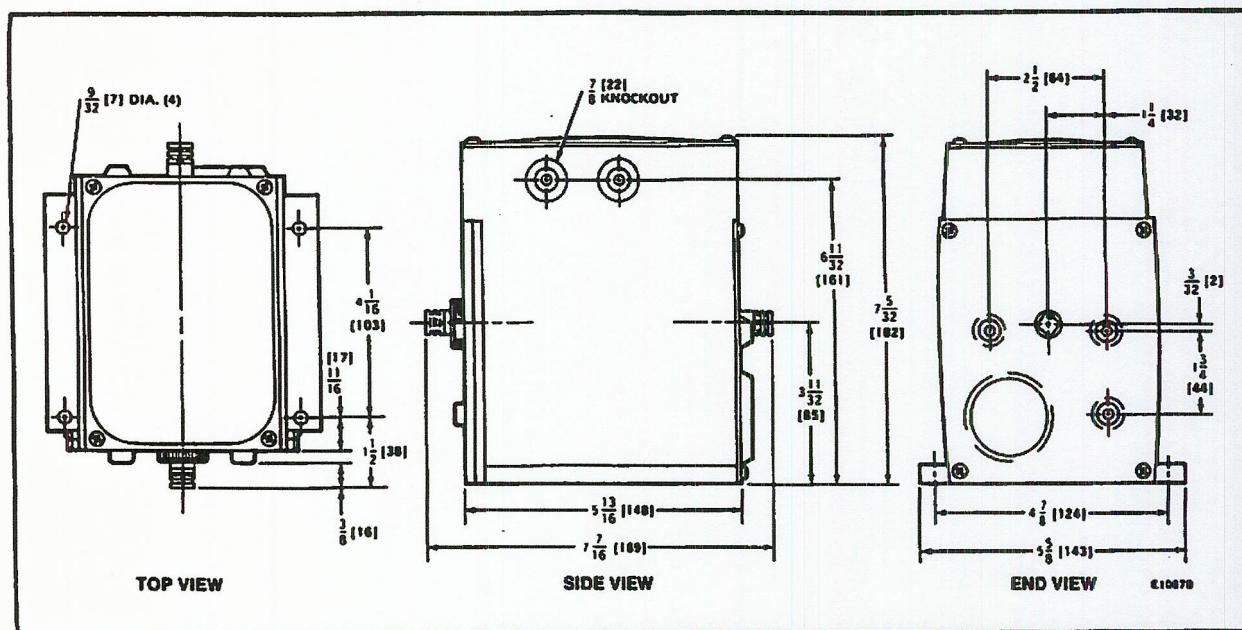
APPROXIMATE DIMENSIONS OF M941 MOTORS IN in. [mm SHOWN IN BRACKETS].
